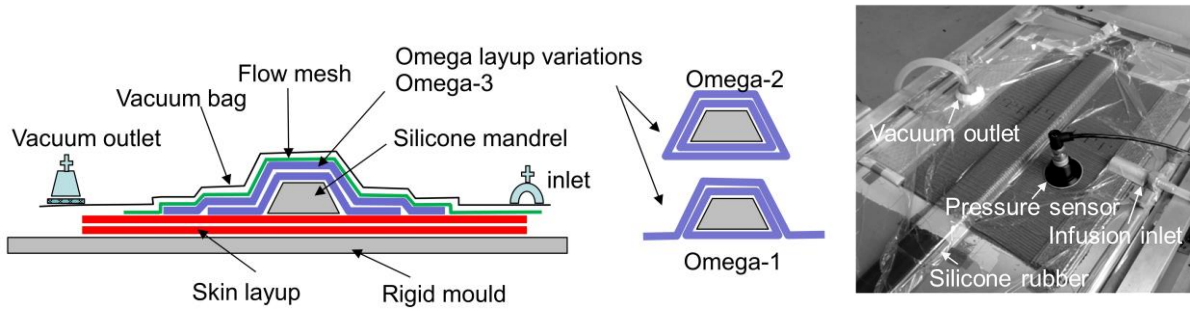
Sketch (Left) and actual setup (Right) of vacuum assisted resin transfer moulding for manufacturing Omega beam 1, 2 and 3
